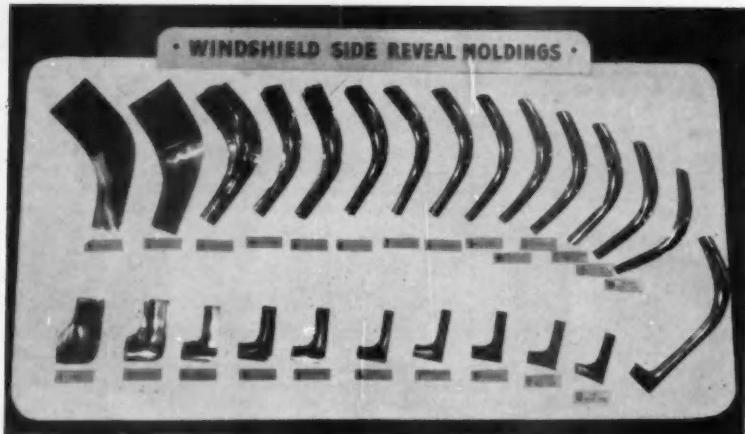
Series of right hand windshield side reveal molding parts as they appear in successive stages of production and after the two are joined by welding and are plated. Similar left hand parts are produced in the same Ternstedt plant.
